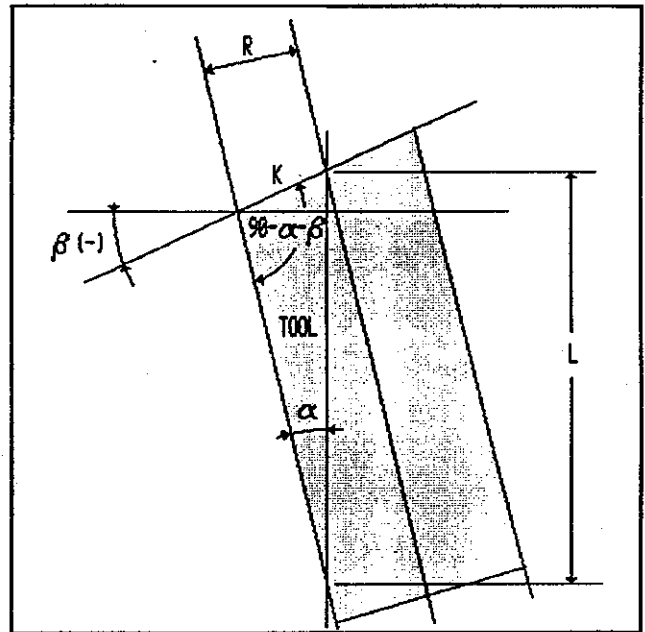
A tool with a negative top rake and a cylindrical clearance angle.
